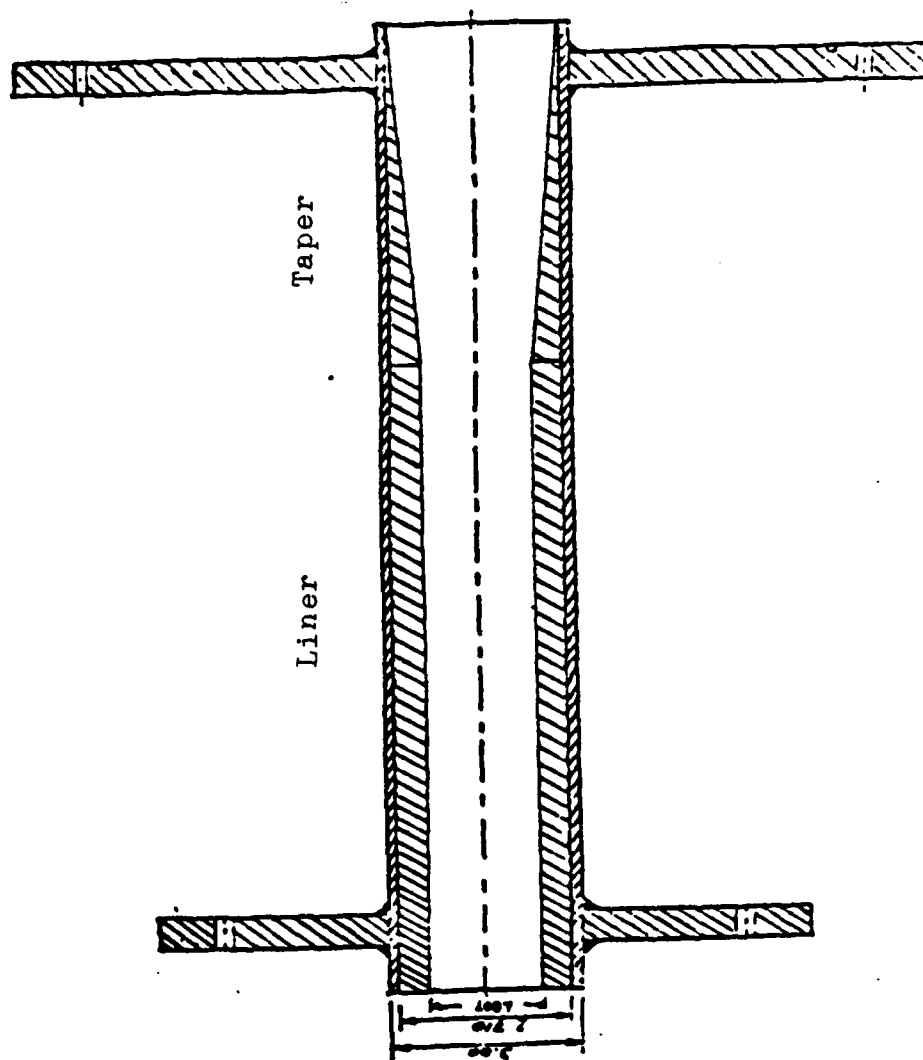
Straight Tube Diffuser (Two-Thirds)
